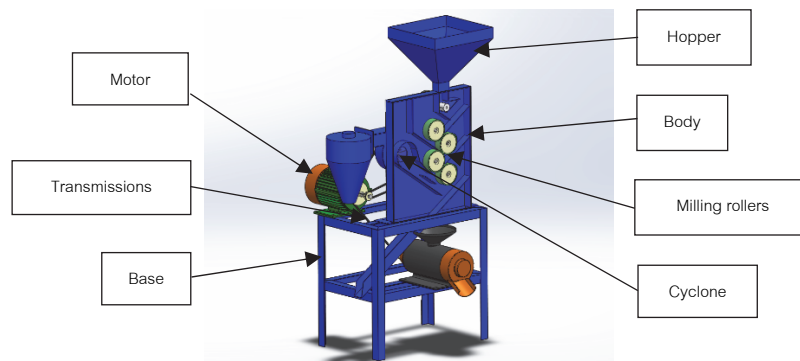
Small brown rice milling machine by using 4 rubber rollers.
